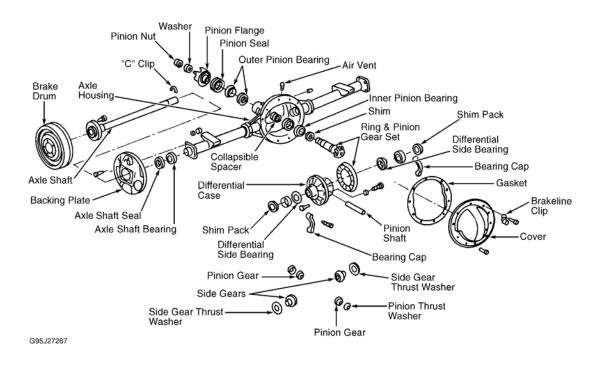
Axle Assembly (8 1/2" & 8 5/8" Shown; Others Similar) Courtesy of GENERAL MOTORS CORP.
